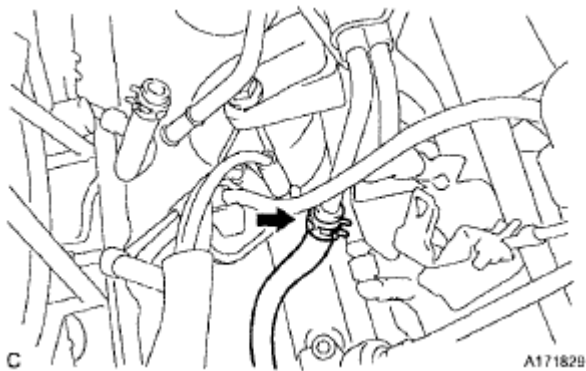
Locating Oil Cooler Outlet Hose And Claws
